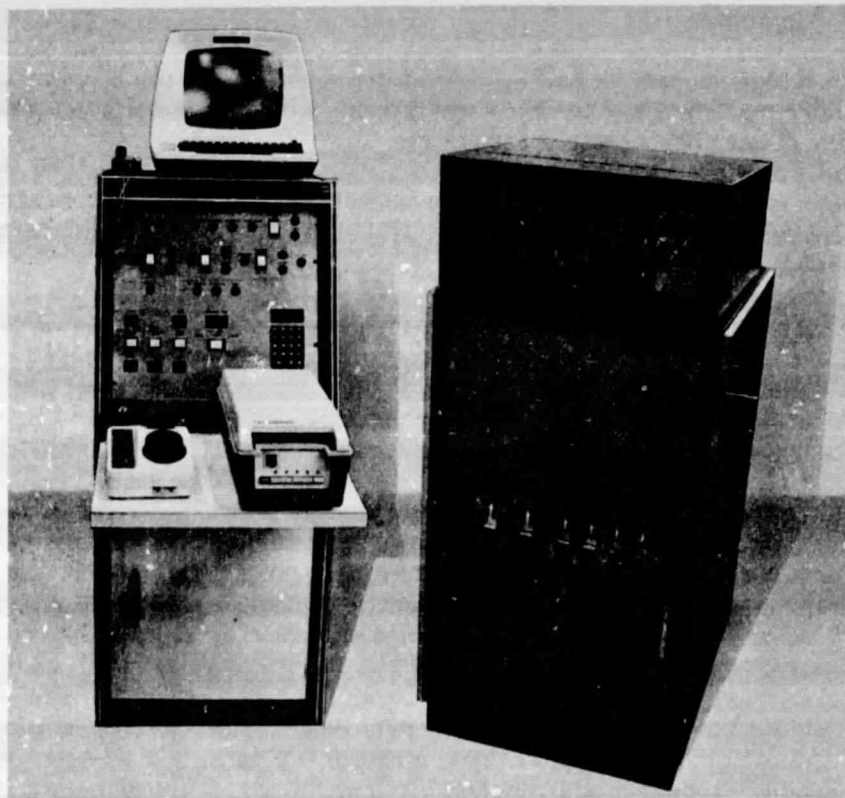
Process Control Equipment for Vertical Clamping Injection Molder
